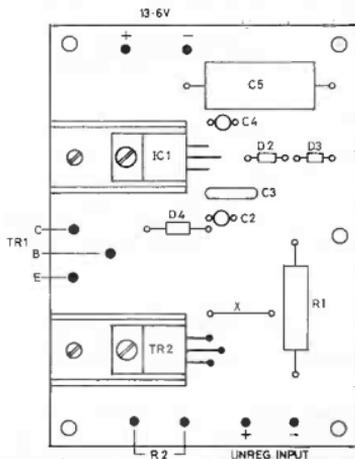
PCB LOCATION OF COMPONENTS (Full size)
